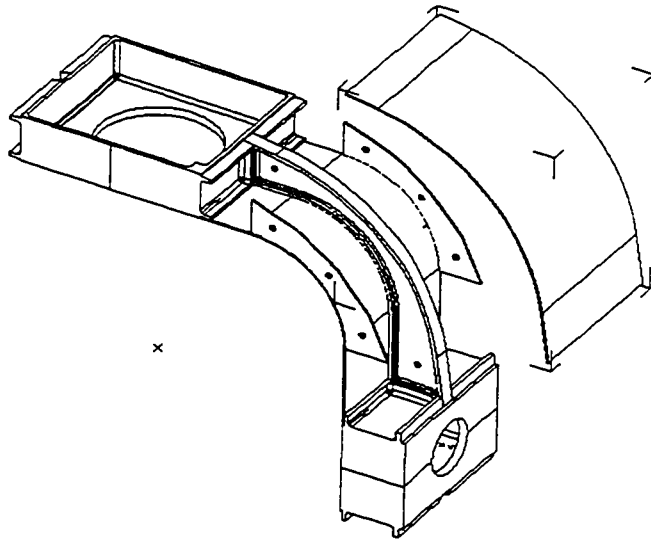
Unconventional Stellar Aspect Experiment Yoke Assembly
